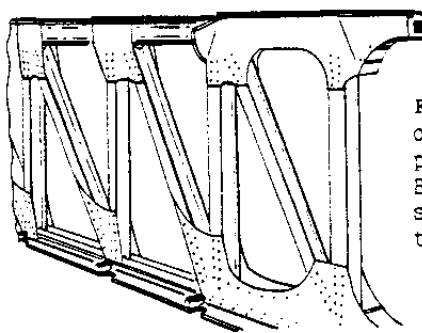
Wing beam of Boeing "Clipper" flying boat. Basic flange section is square tube.
